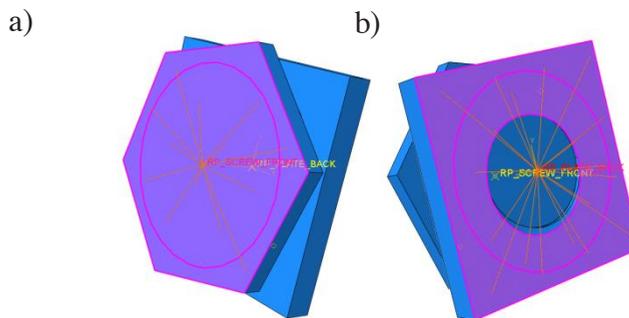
Constraints: a) coupling references point with bolt head, b) coupling references point with bottom of plate.
